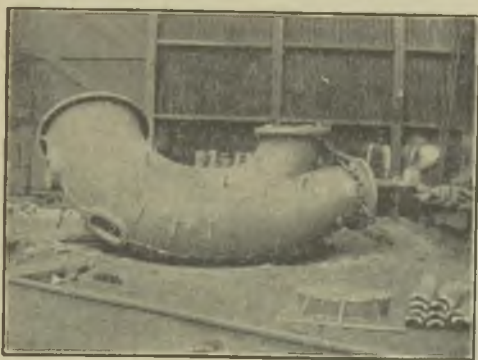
LARGE PIPE CASTING TAPERING FROM 42 IN. DIA. TO 24 IN., RAMMED ENTIRELY BY THE SAND SLINGER.
